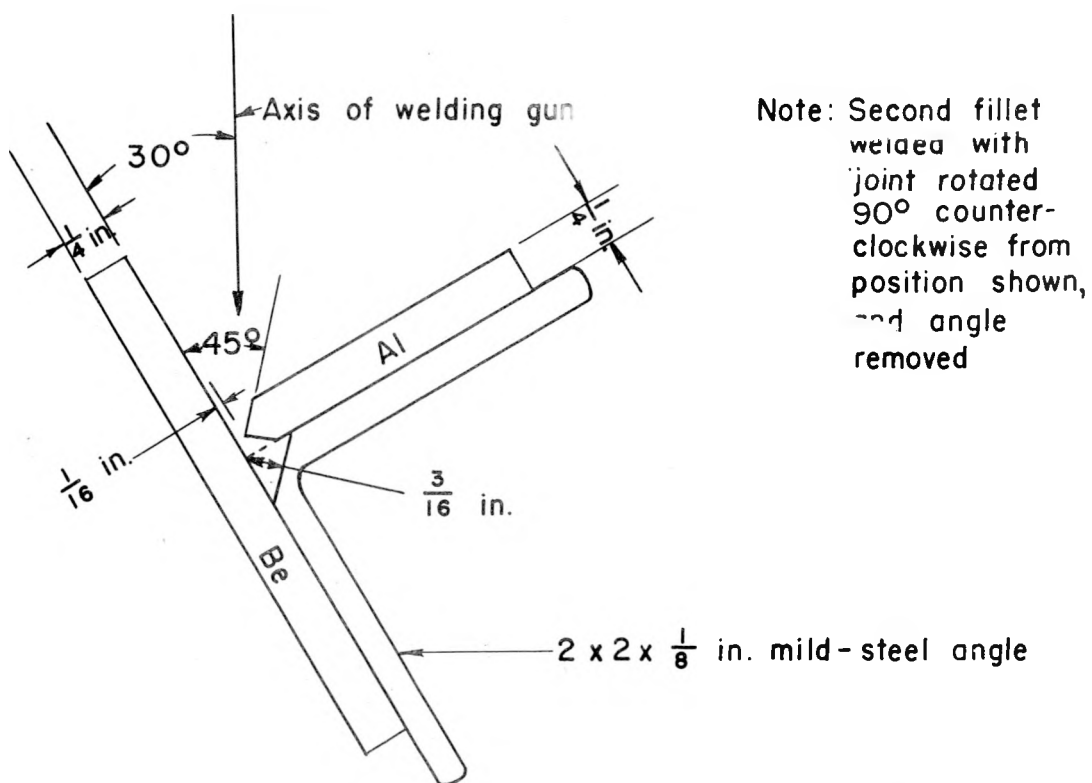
CROSS SECTION OF RIB JOINT IN POSITION FOR WELDING FIRST FILLET
